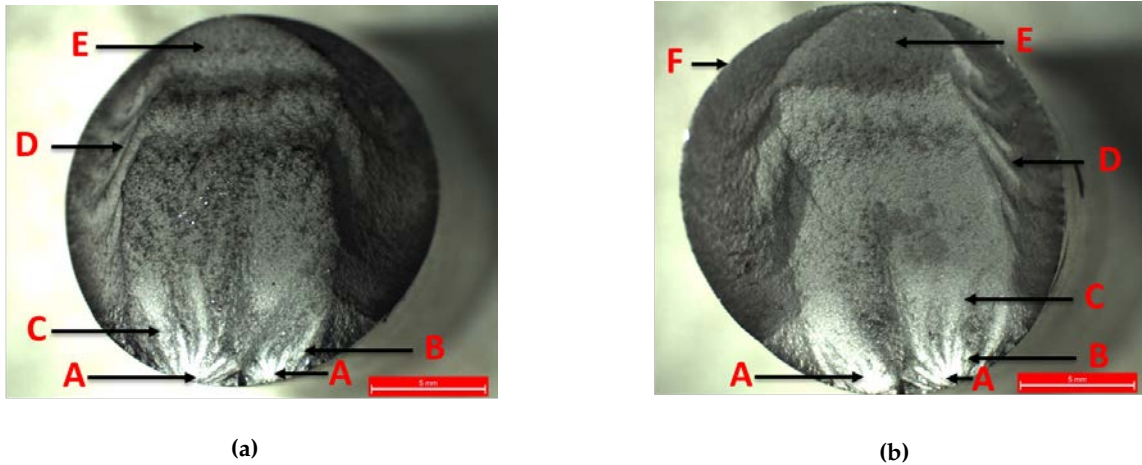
Fractograph of "As Machined"/T6 Test Specimen 1
